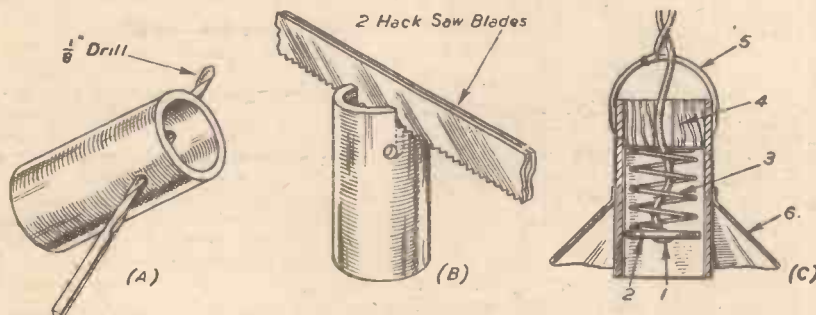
(Left).—Two operations necessary to make a bayonet socket for car bulbs. (A) Drill $\frac{1}{8}$ in. hole, (B) make two cuts, using two hacksaw blades.
